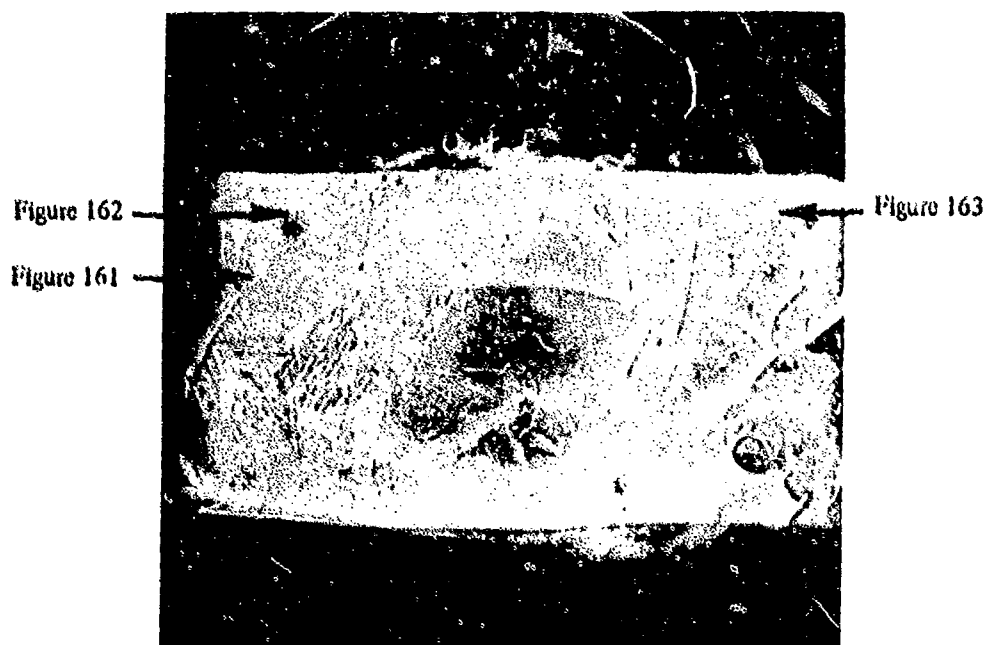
Fatigue fracture surface of AX-110 weldment containing porosity, 10x.
